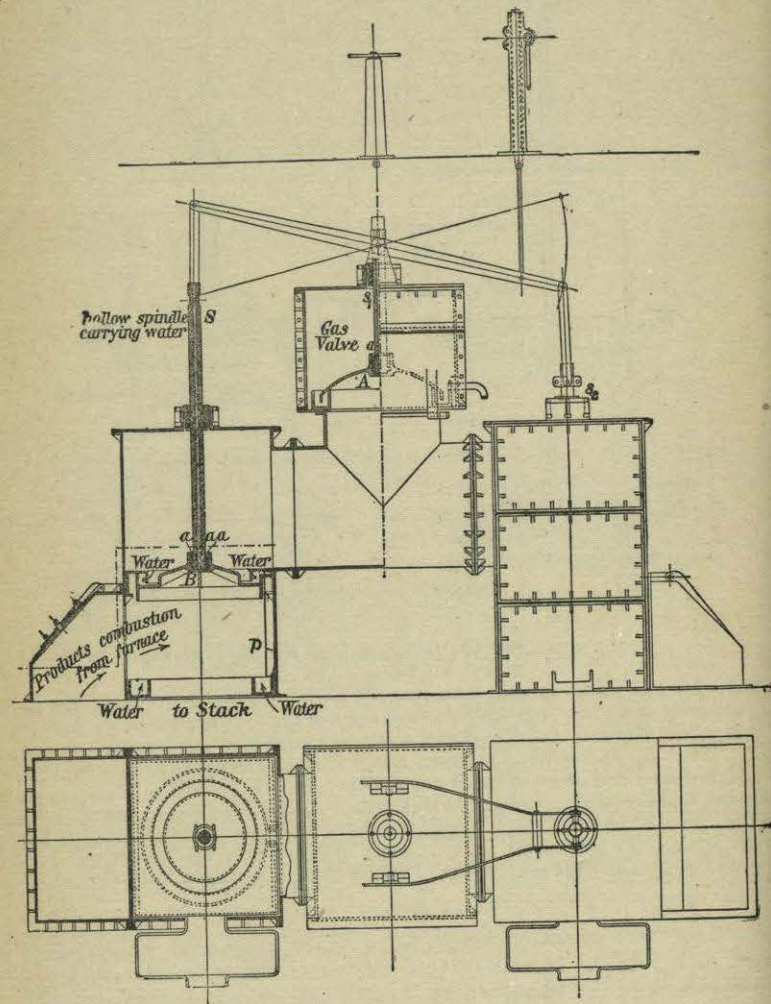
The Mills Water-cooled Gas Reversing Valve.
